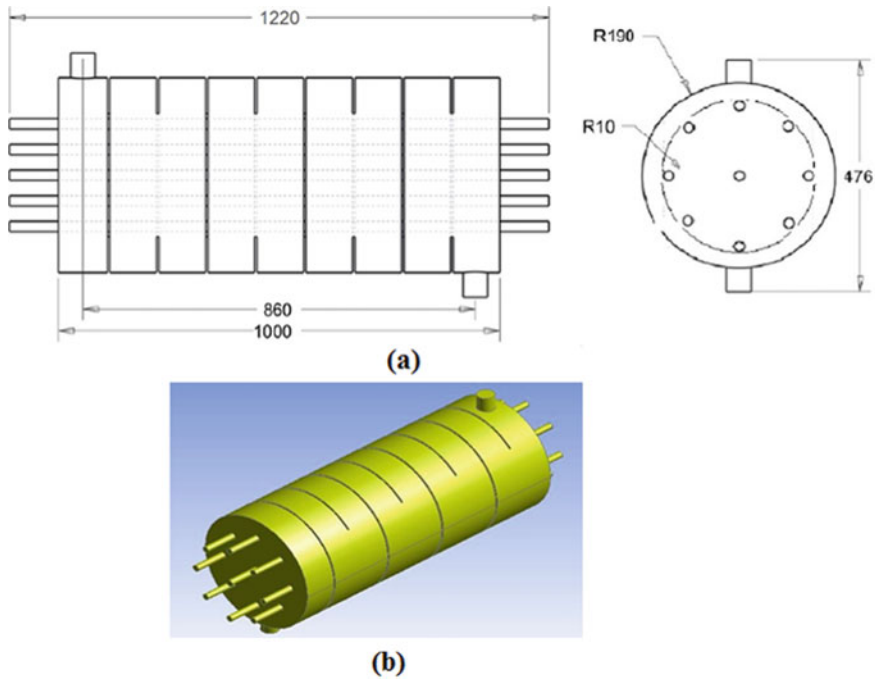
a Front view and side view, b 3D-view of STHE with circular pattern
